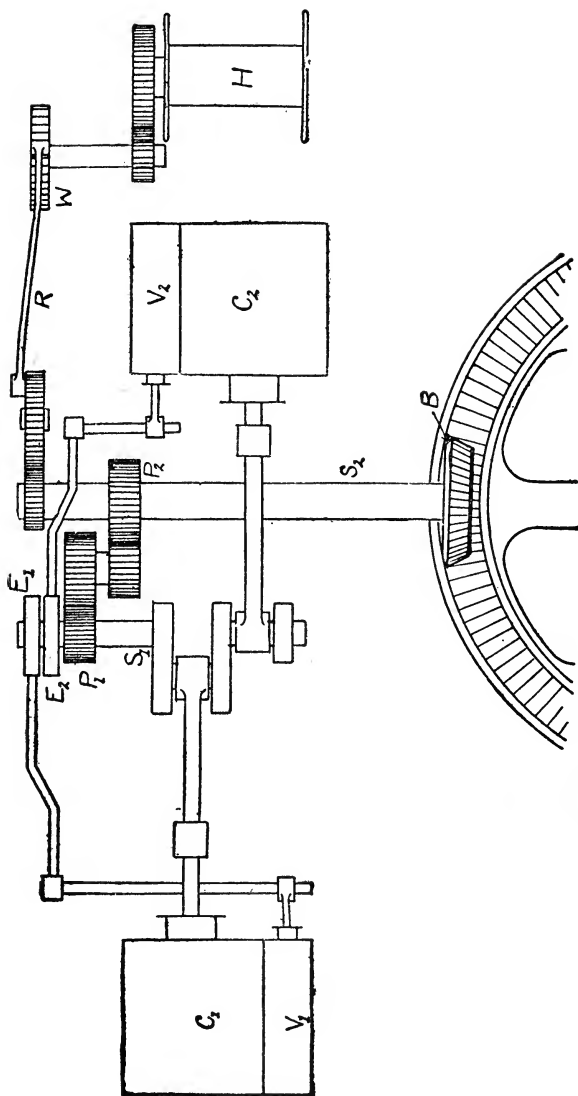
Arrangement of Gearing in Disc Coal-cutter.
